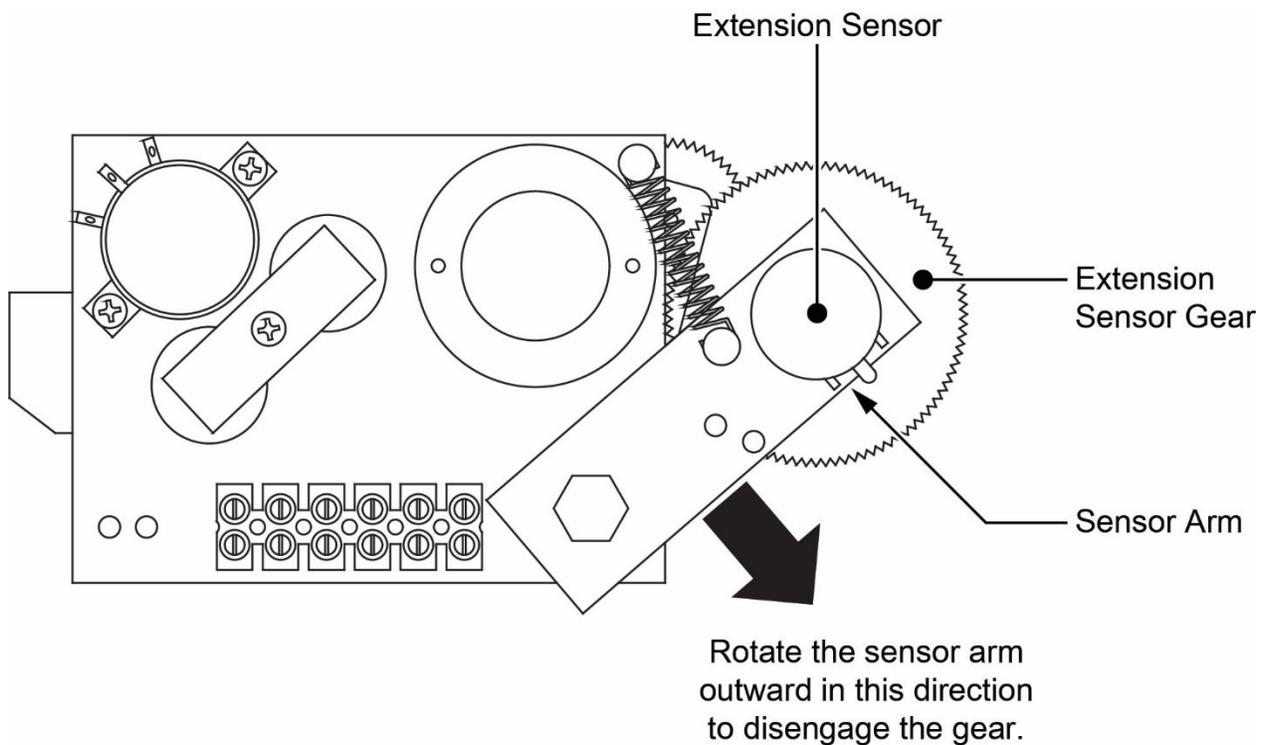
SENSOR BASEPLATE ASSEMBLY
